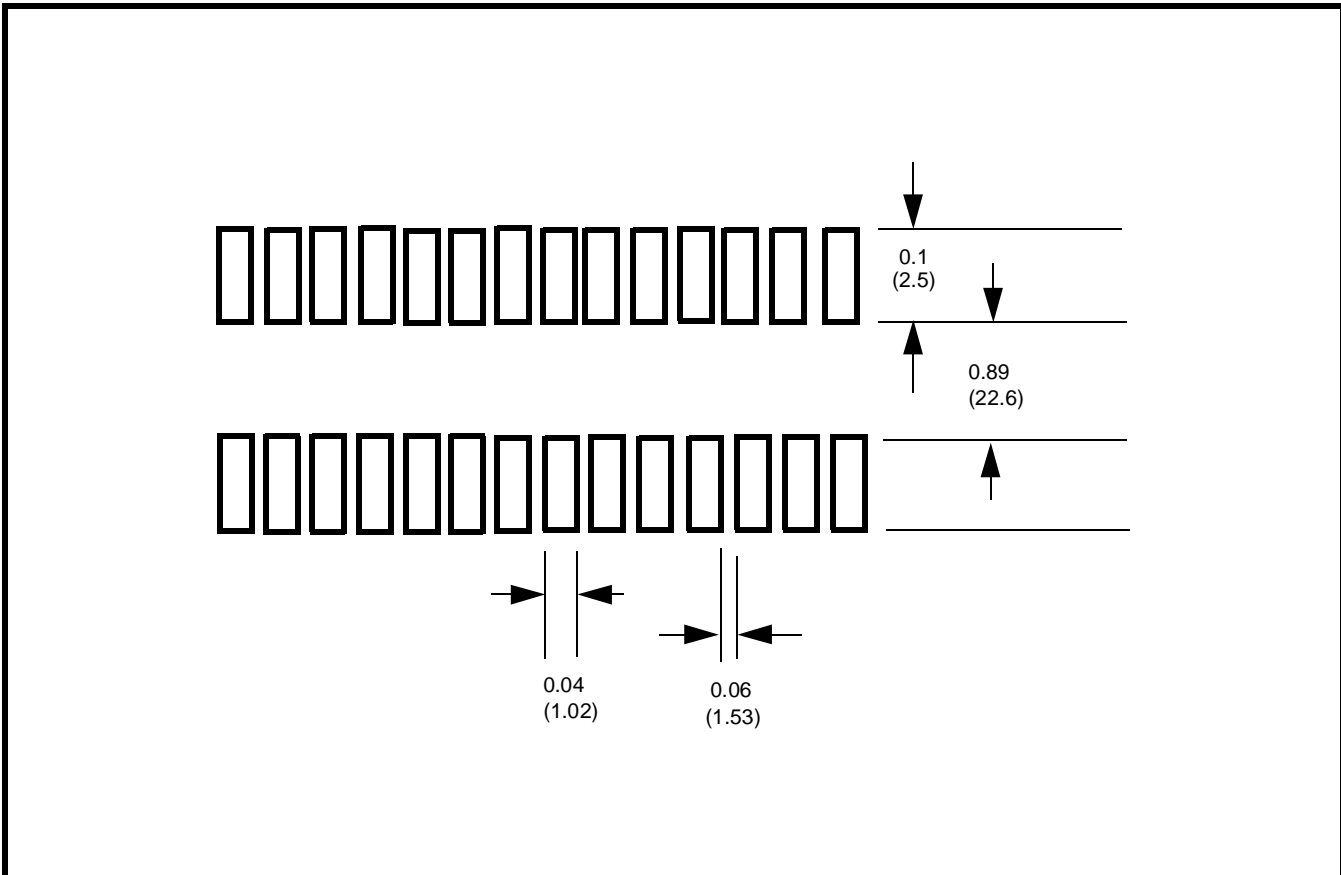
Recommended Footprint for 28 Pin Surface Mount Hybrid
